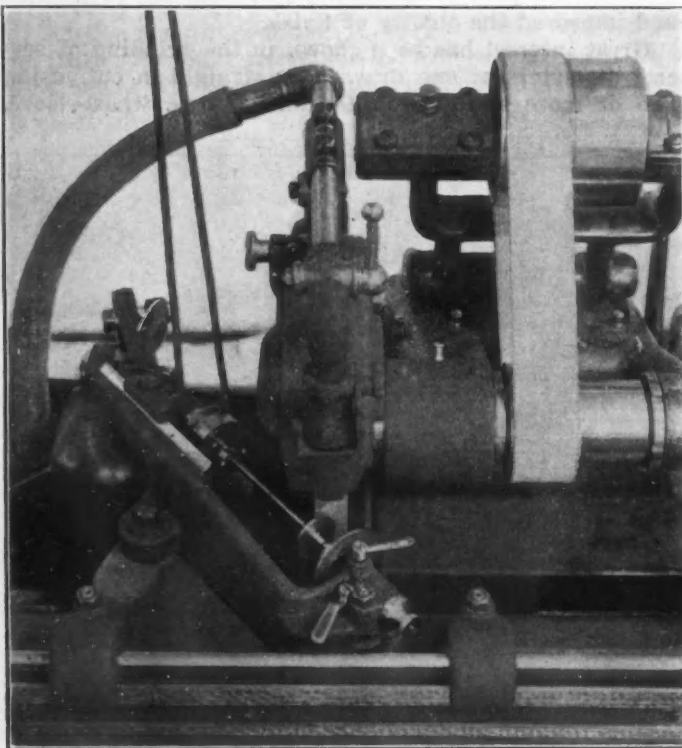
VALVE FACE GRINDING ATTACHMENT
